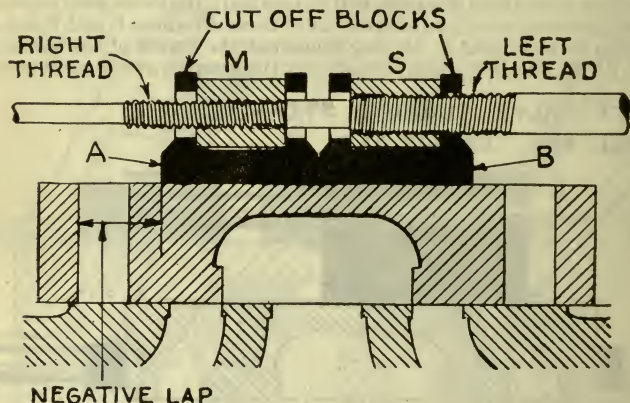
The riding cut off with fixed eccentric, showing cut off blocks M, S, screwed together when setting the valves. The cut off is latest when the blocks are together, depending on the negative lap. After setting the valves, the blocks should be fully extended for earliest cut off to see if there be any reopening after cut off and before the main valve has closed.
